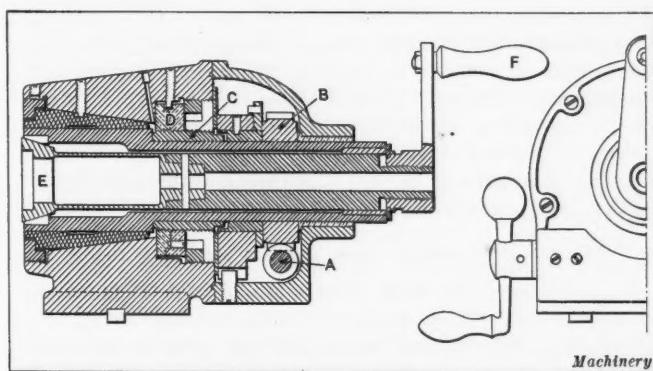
Hand-operated Thread Milling Attachment having a Worm-gear Drive
